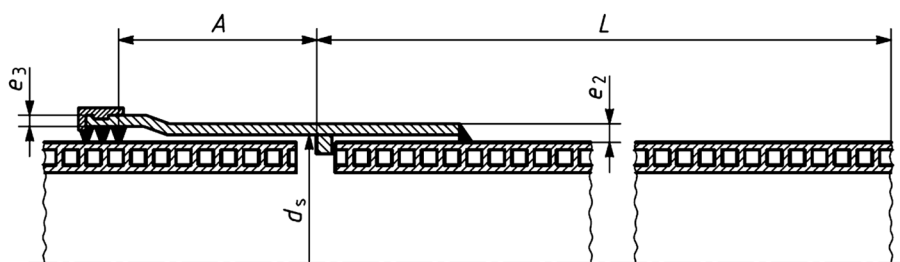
Typical example of wall construction Type A26.2.3 Typical jointing methods for structured-wall pipes Type A
